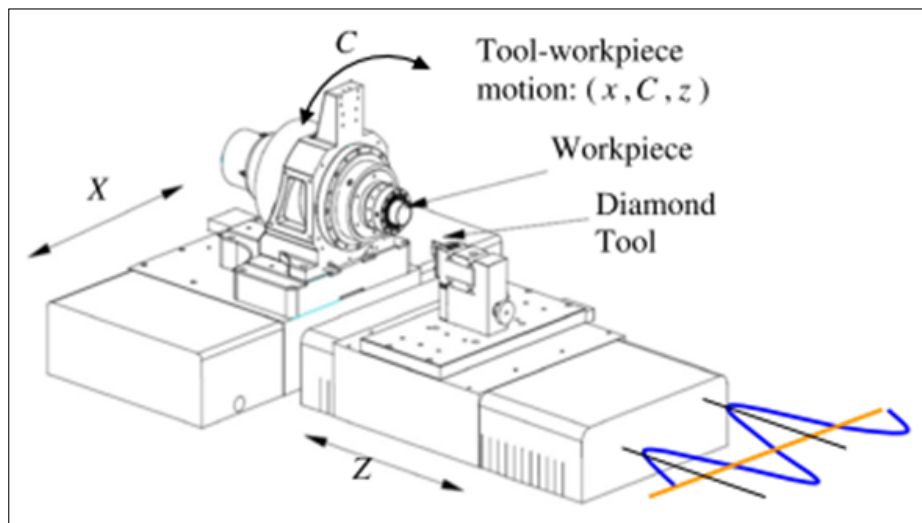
Photography of 3S machining system, Slow Slide Servo mode
